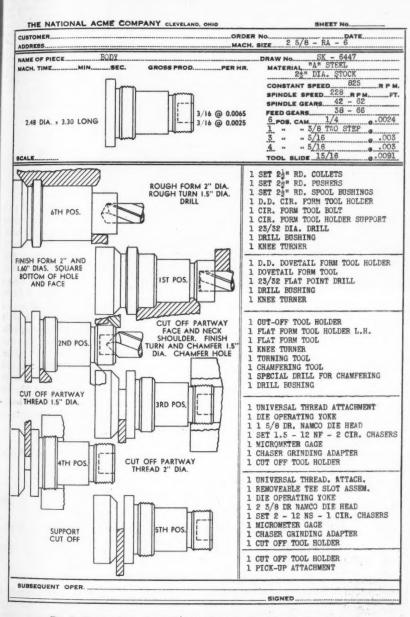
Tooling Layout and Set-Up Chart for Steel Spark Plug Body
